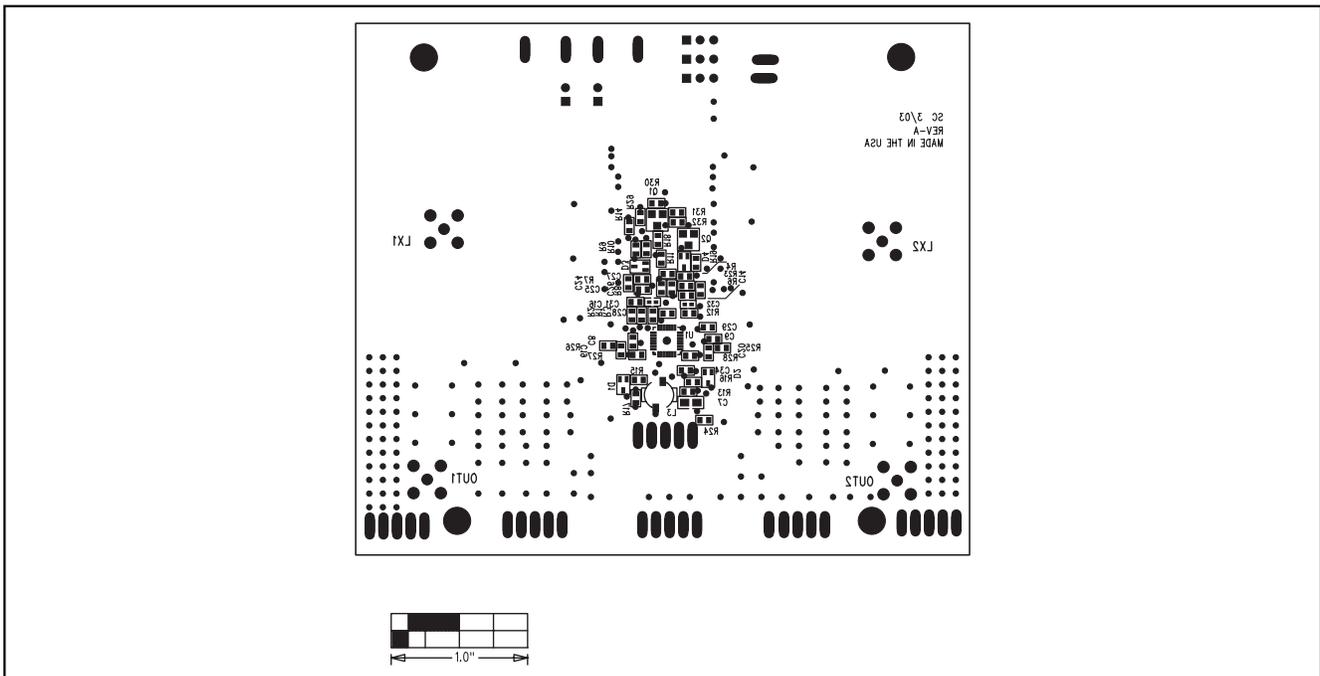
MAX1955 EV Kit Component Placement Guide—Solder Side
